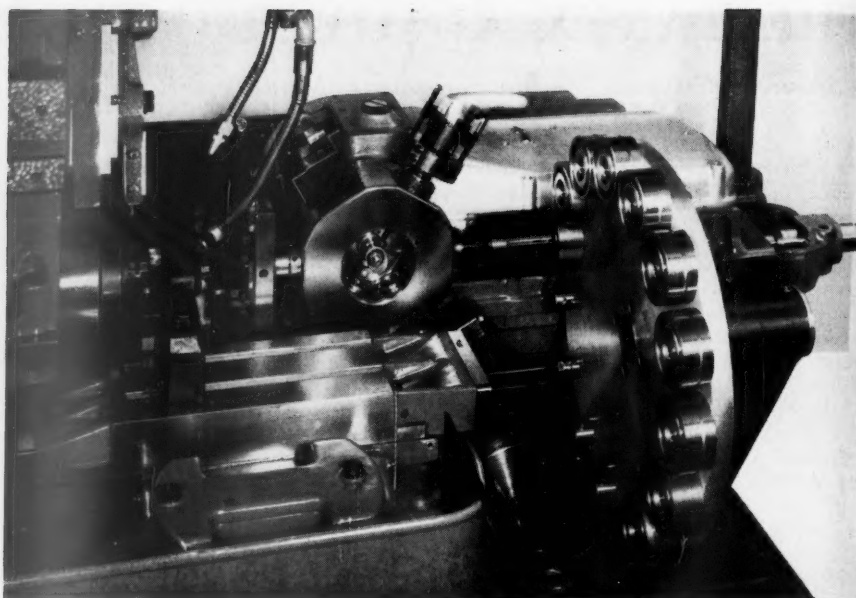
The Tarex single-spindle automatic turret lathe, model TAR-H
